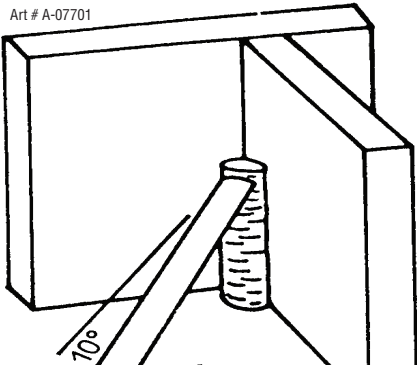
Single Run Vertical Fillet Weld
